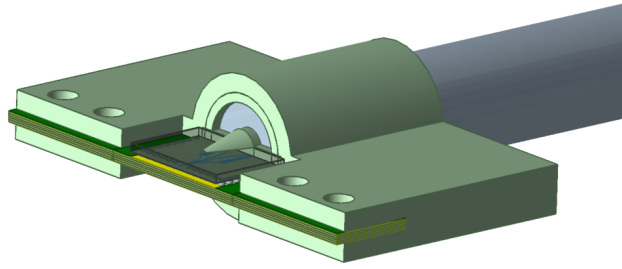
PCB layout showing the holes used for mounting the fixture.
